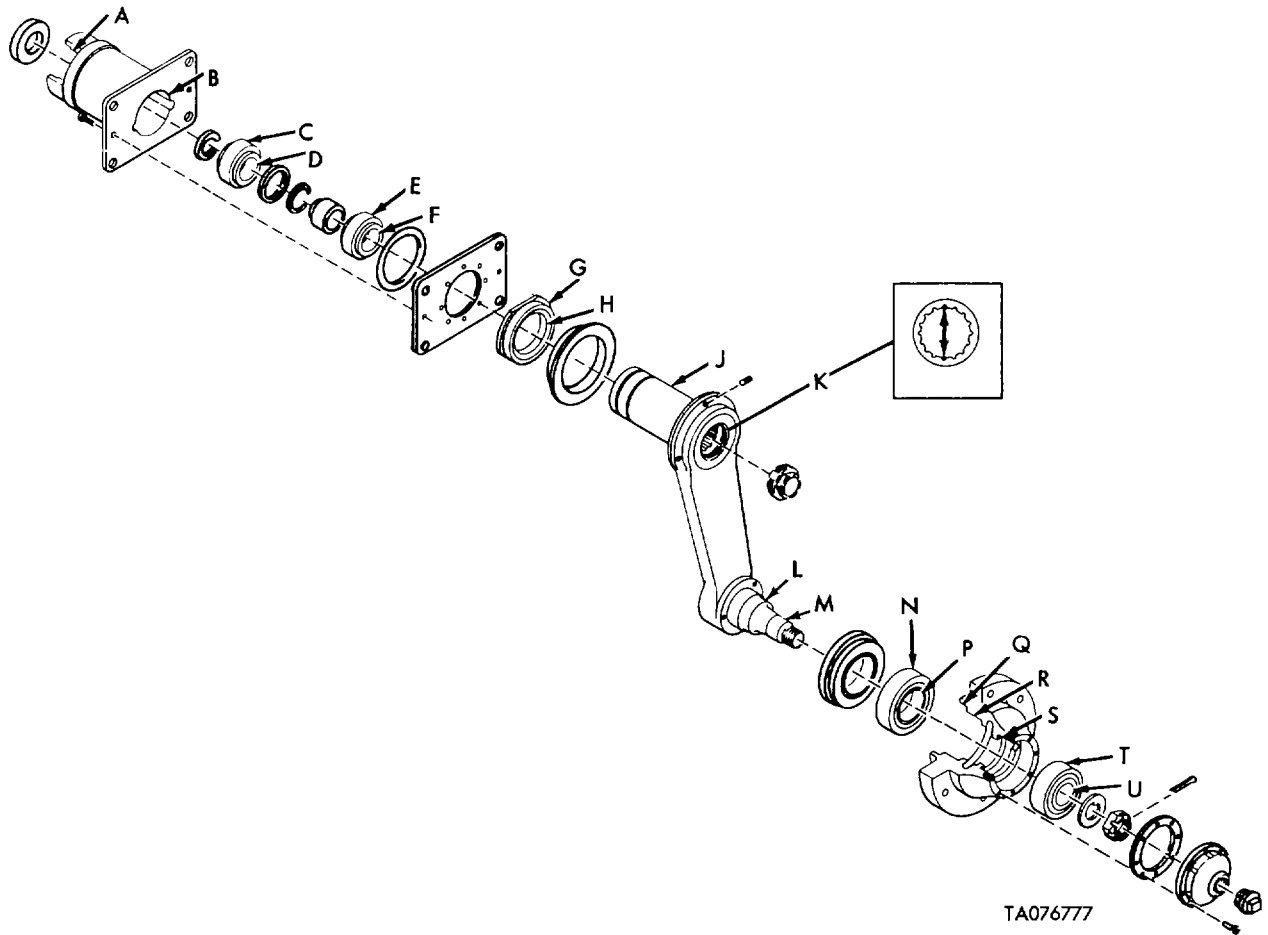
Axle and Hub Assembly Wear Limits (Sheet 1 of 2)
